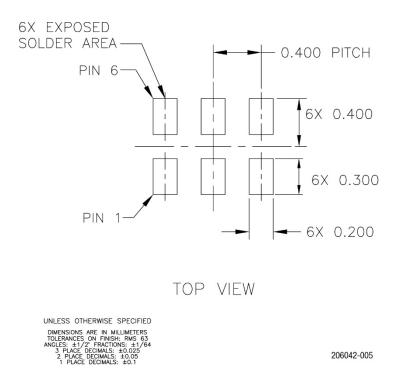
SKY59608-711LF PCB Layout Footprint (Top View)
